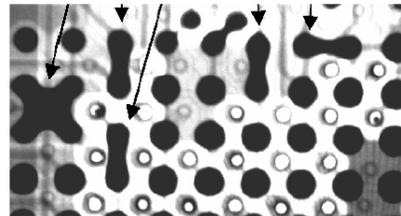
X-Ray Analysis of Solder Ball Short After Reflow
